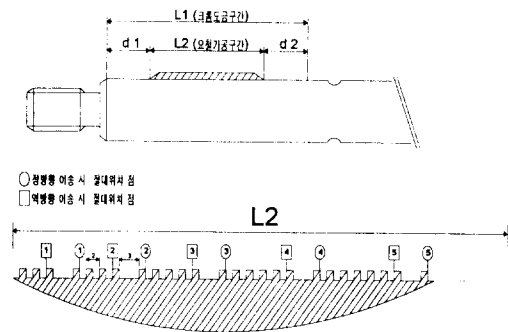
A section of piston rod and datum points for detecting absolute position
